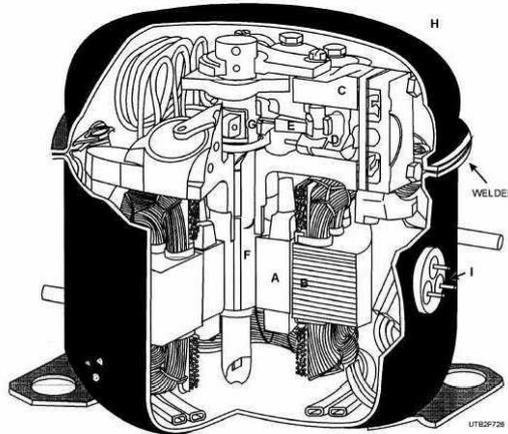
Reciprocating hermetic compressor. (A) Motor rotor; (B) Motor stator; (C) Compressor cylinder; (D) Compressor piston; (E) Connecting rod; (F) crankshaft; (G) Crank throw; (H) Compressor shell (I) Glass sealed electrical connection.
